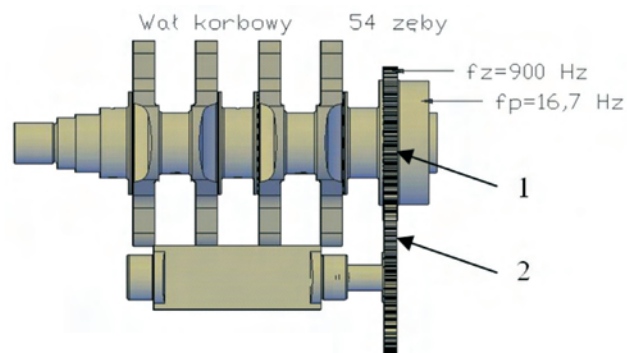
Schematics of the gear set of the ratio of 1:1 used in the tested engine: 1 – crankshaft with a toothed flange, 2 – toothed wheel of the balance shaft
